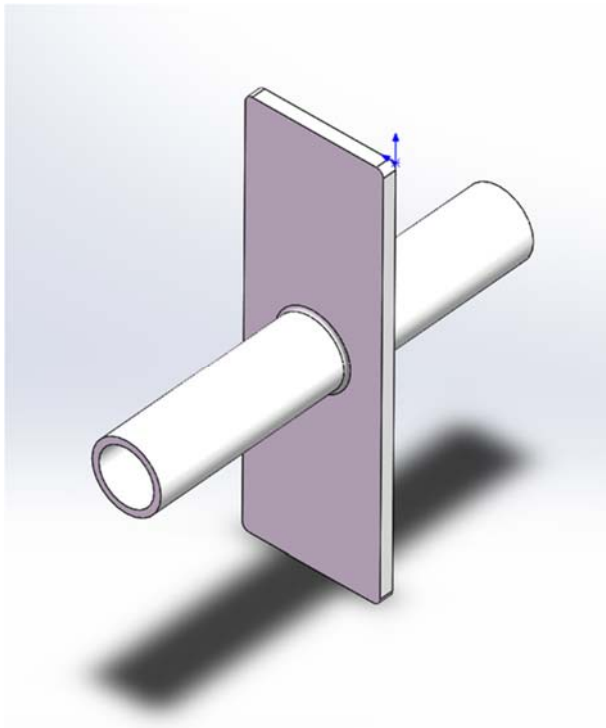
THREE-DIMENSIONAL GEOMETRIC MODEL OF THE RADIATOR WITH A FLAT PANEL AND A CIRCULAR TUBE.
